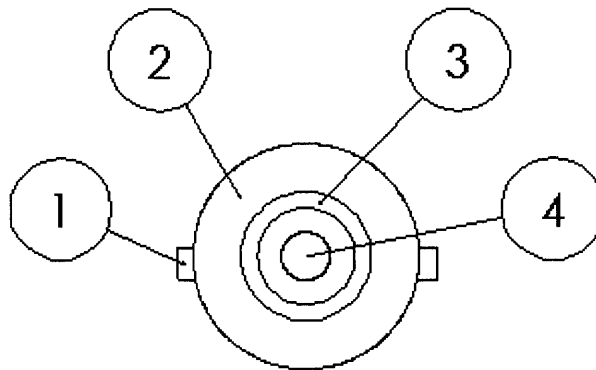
Spring Mount Viewed From Above. Several pieces of the spring mount can be seen when looking at the mount from directly overhead. They are (1) the rectangular bottom attachment, (2) a washer, (3) the piece of one inch tubing, and (4) the rod on which the spring is slid. The rod should be concentric with the one inch tubing during the suspension system's operation.
